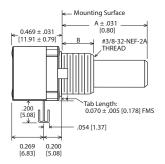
SHA: Quad Potentiometer or RS, Solder Hooks, 1/4" Dia. Bushing
